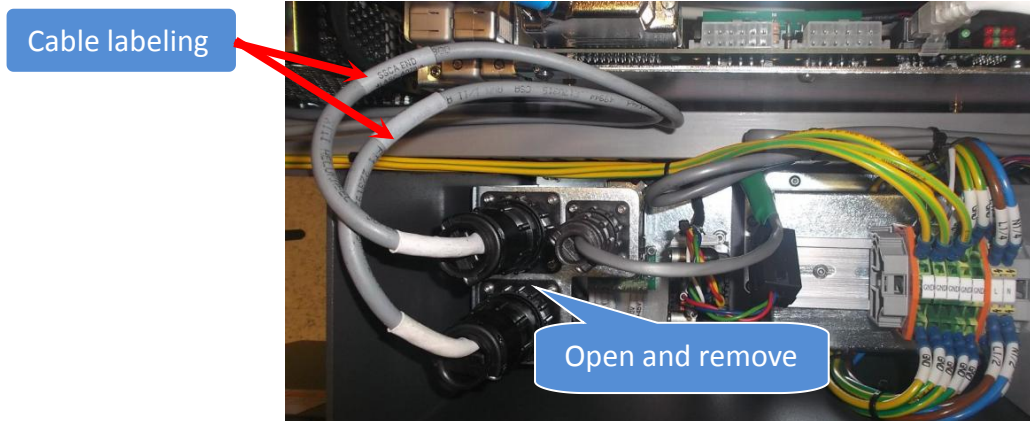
Stepper Motor Cable Removal (Stepper Driver)
